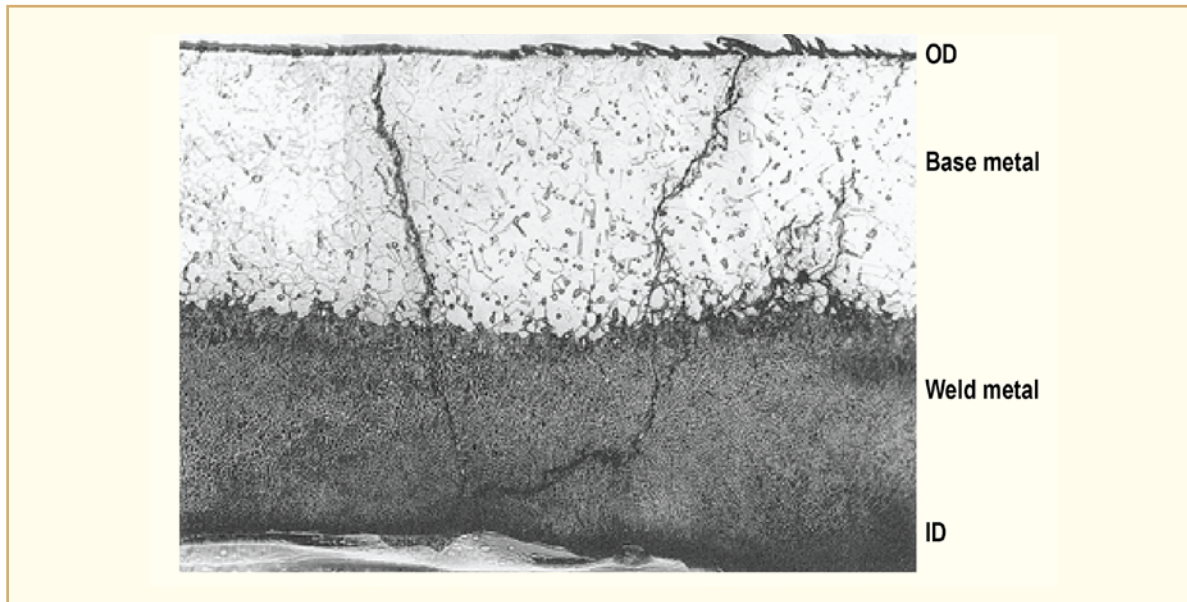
Canopy seals. SCC cracks propagating into the base metal from the penetration flange and into the weld (x34) ([Cattant, 2014]).
